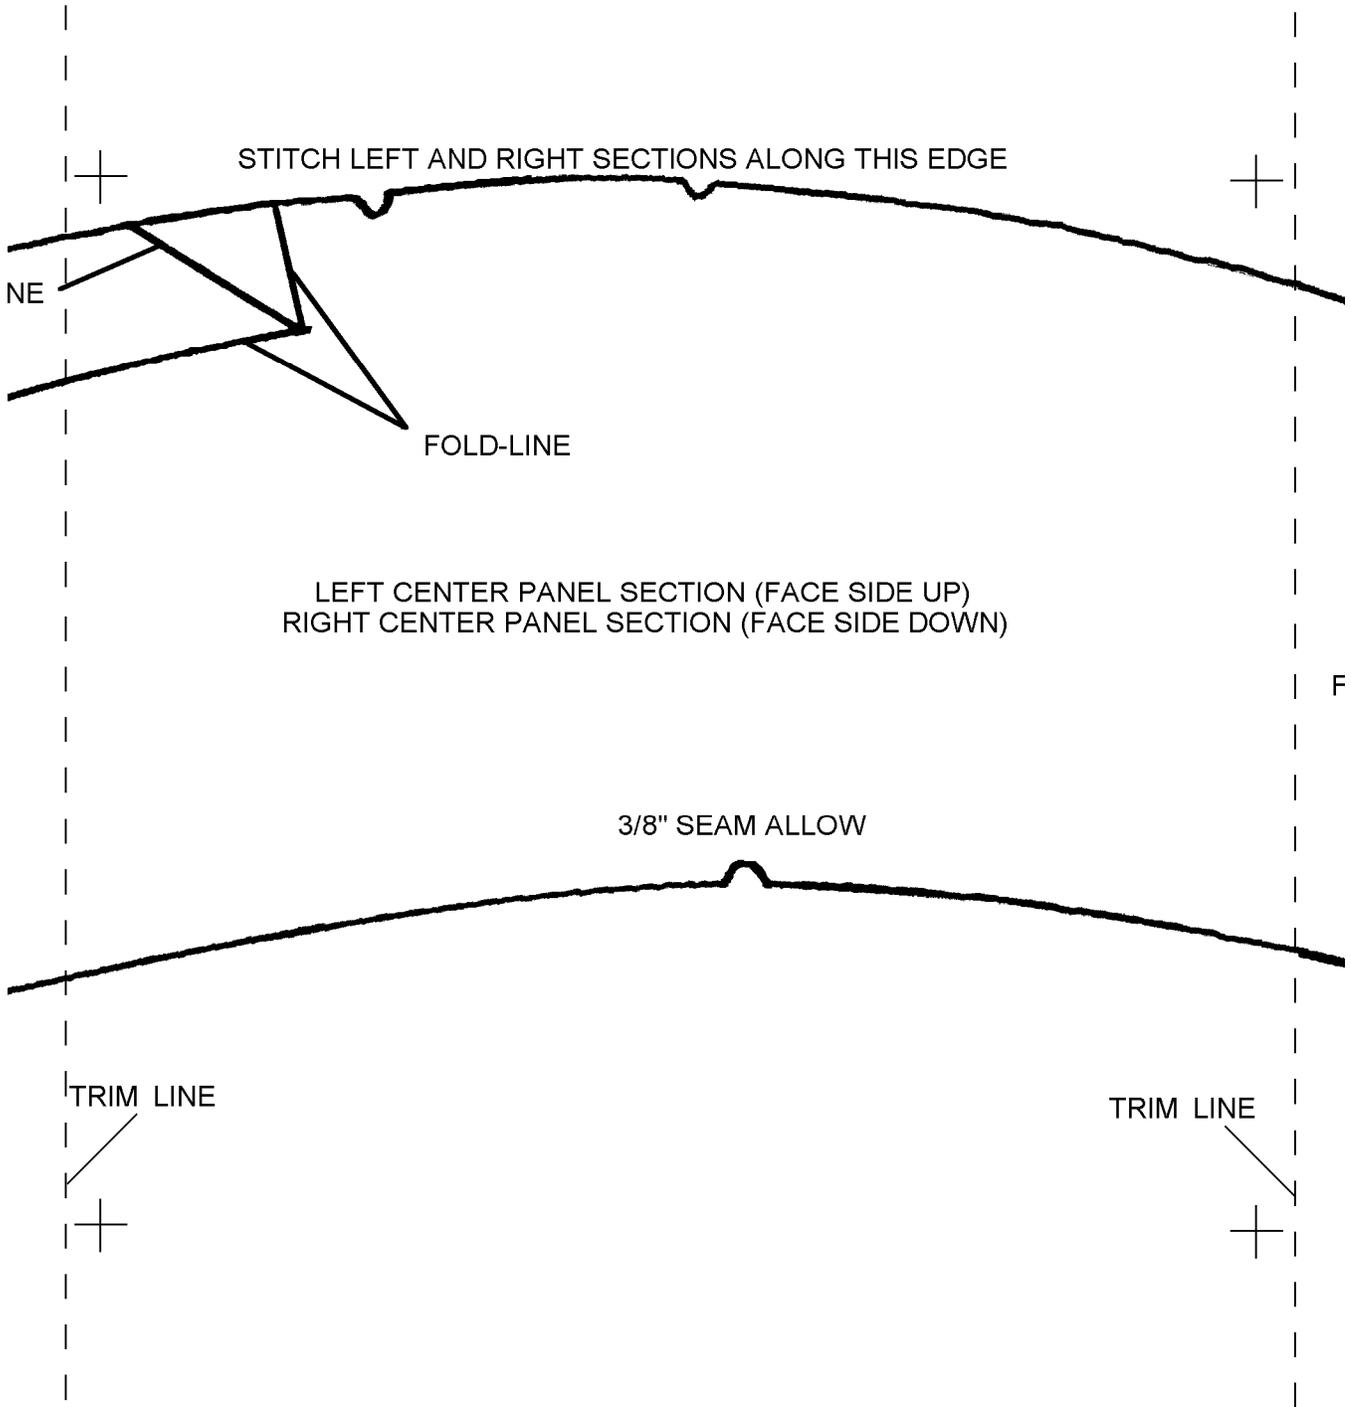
Removable Camouflage Helmet Cover (Large) (2 of 5)
